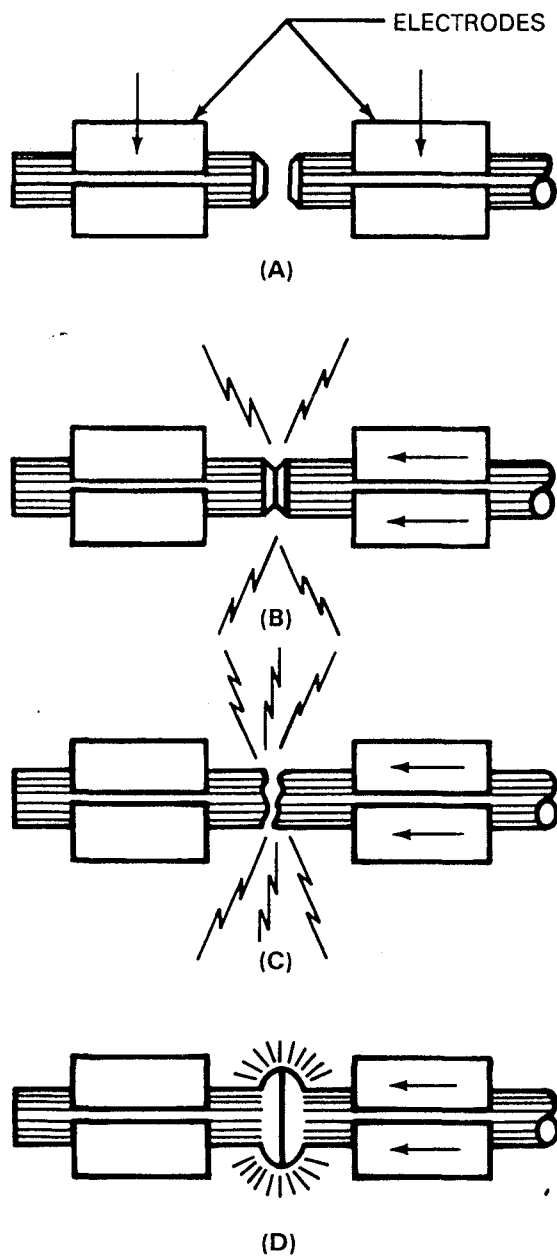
The Basic Steps in Flash Welding:
